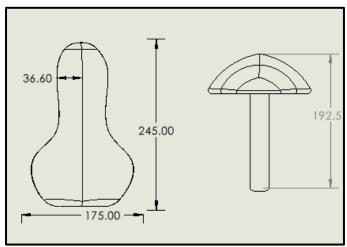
Saddle and seat post technical drawing. All dimensions in mm.
